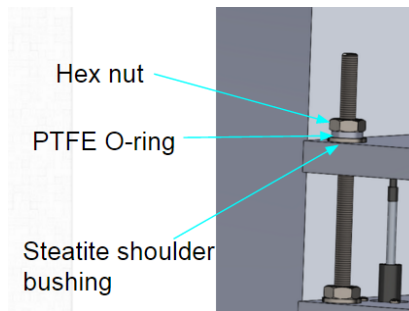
Close-up of the vacuum chuck and heater connections.
